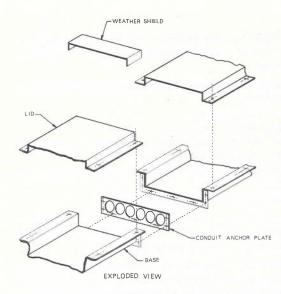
The Box Section Beam with the Conduit Anchor Plate.
